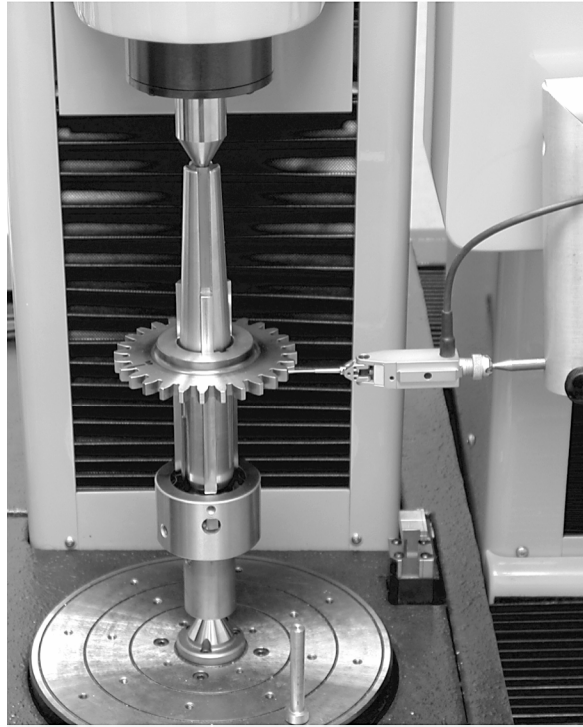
A test gear while being inspected on the gear coordinate measurement machine.
